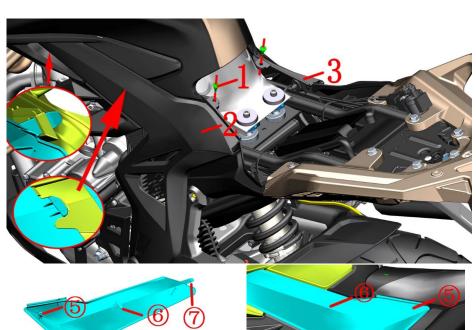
SIDE COVER COMPONENT		Side cover component 1	CHK	Q
